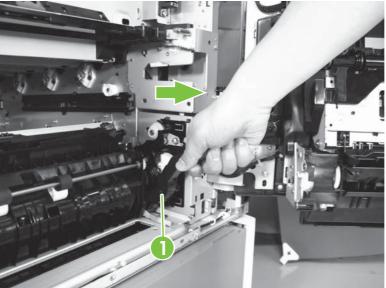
Remove the multipurpose drive unit (4 of 7)
